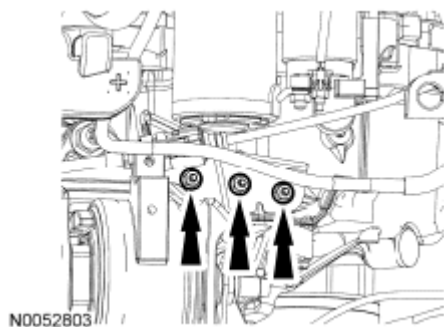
Locating Transaxle Control Cable Bracket & Nuts
